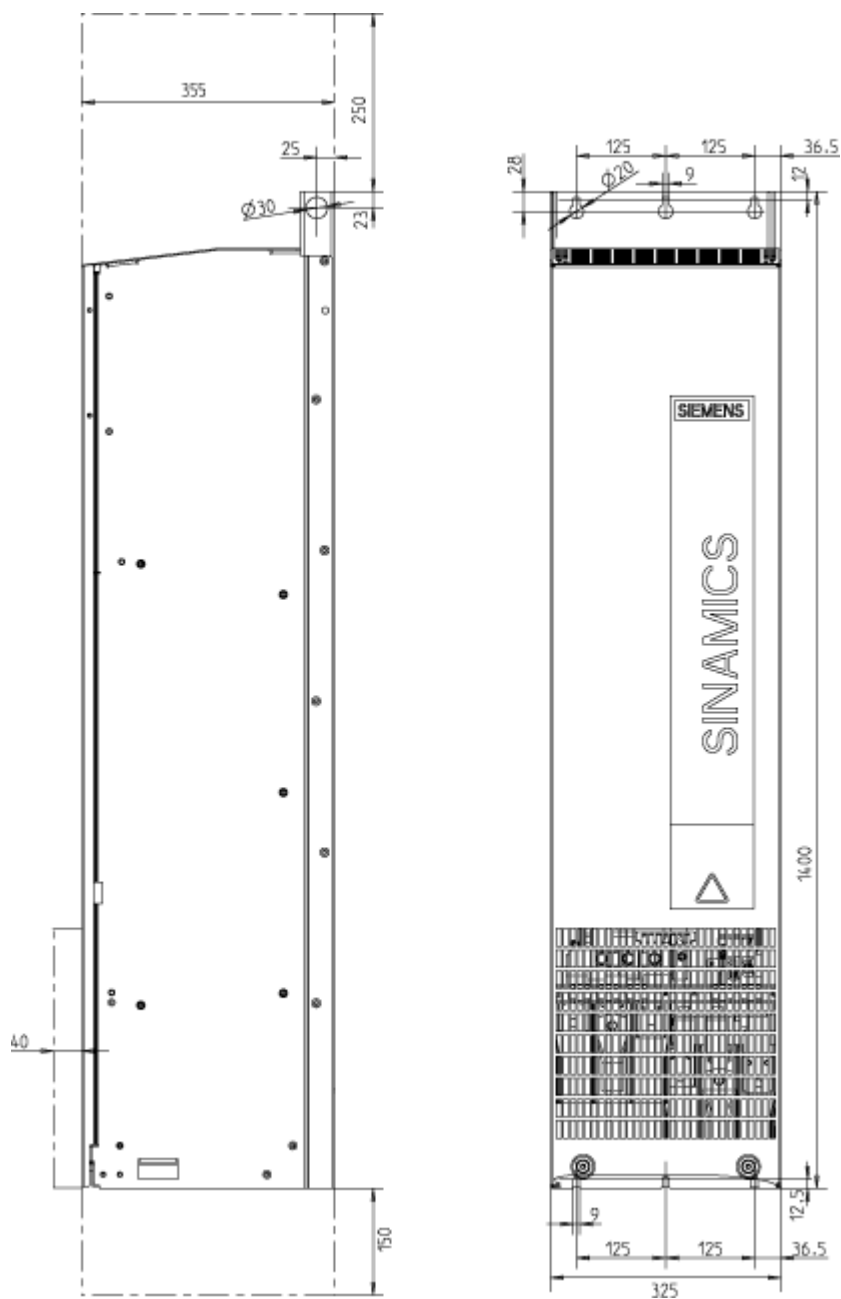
Dimension drawing for Active Interface Module, frame size FI Side view, front view
